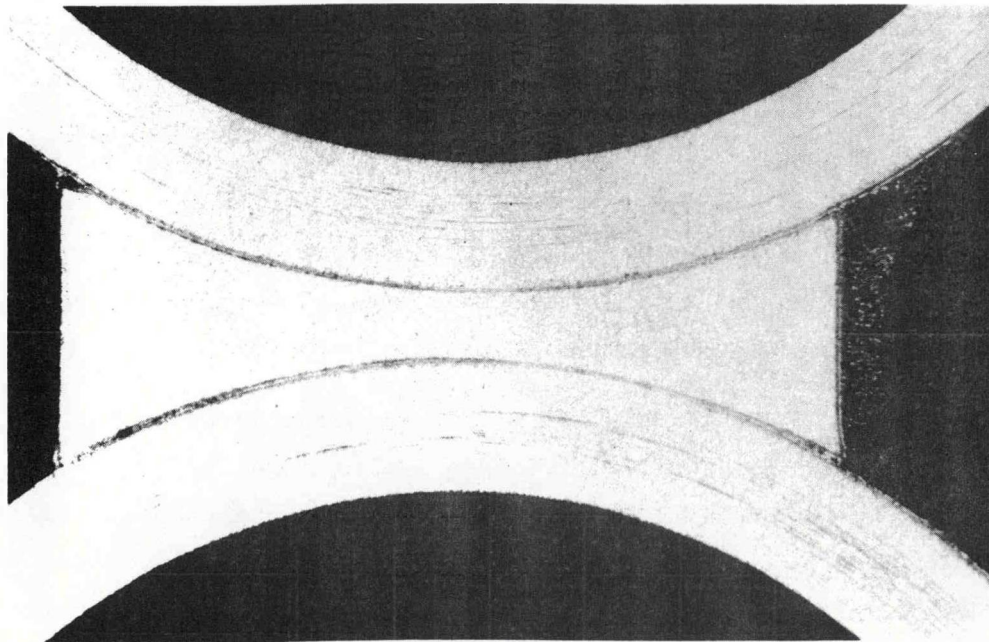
Typical Brazed Joint Using An Hourglass Shaped Filler Strip Between Adjacent Tubes (9.5X Magnification)
